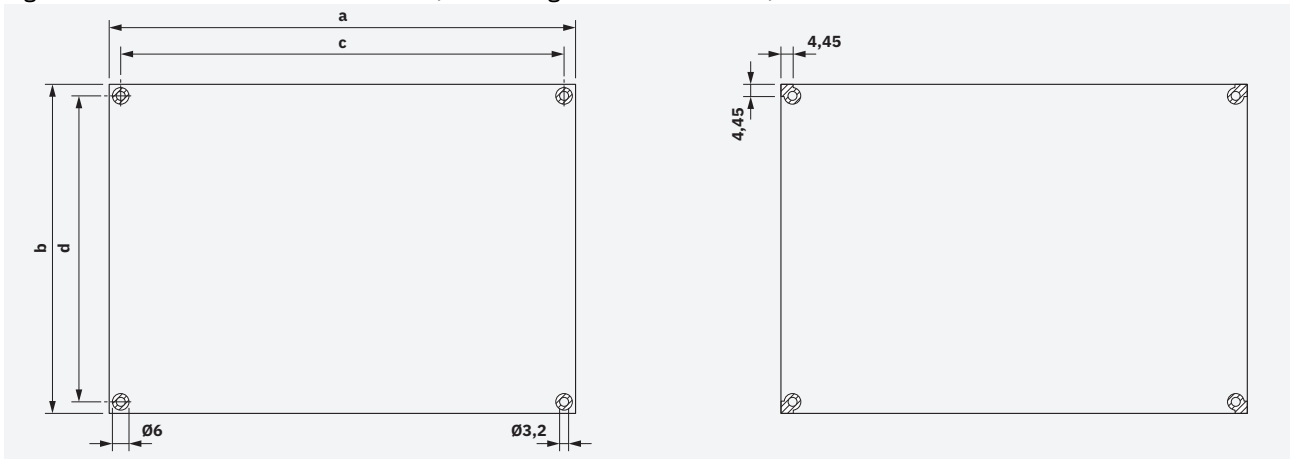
Maximum PCB dimensions (for housings without heatsinks)
